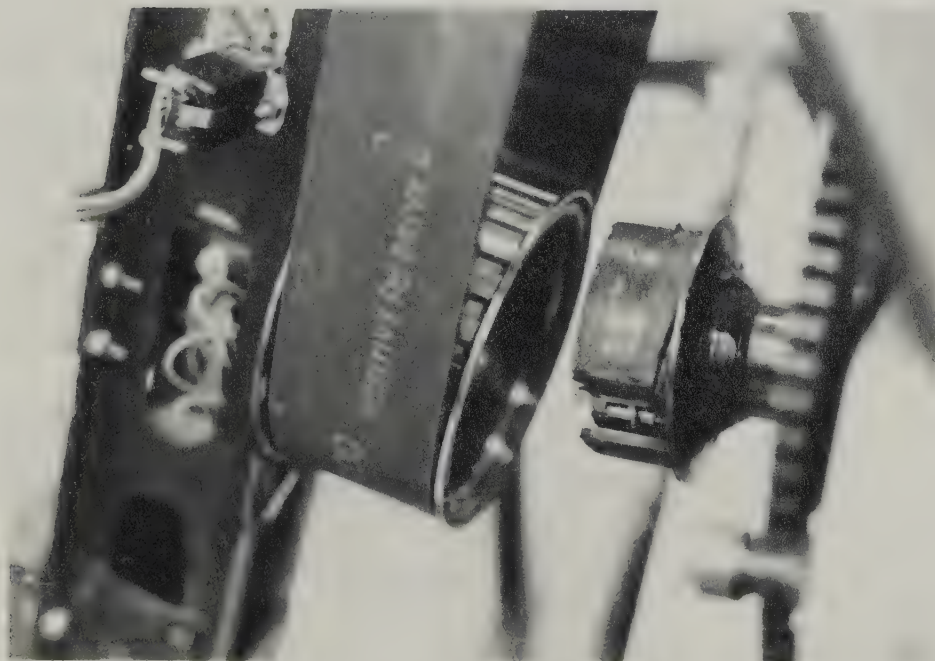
, PHOTOGRAPH SHOWING LOWER SPROCKET COMING IN TO COVER CENTRIFUGAL CLUTCH
